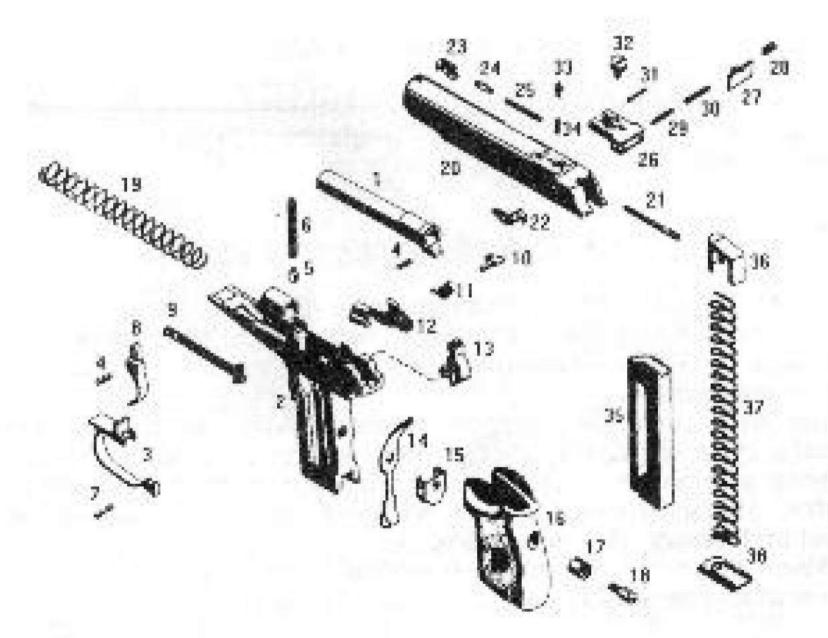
Parts of IJ-70 eight-shot pistol in 9 mm Makarov or Kurz caliber.
